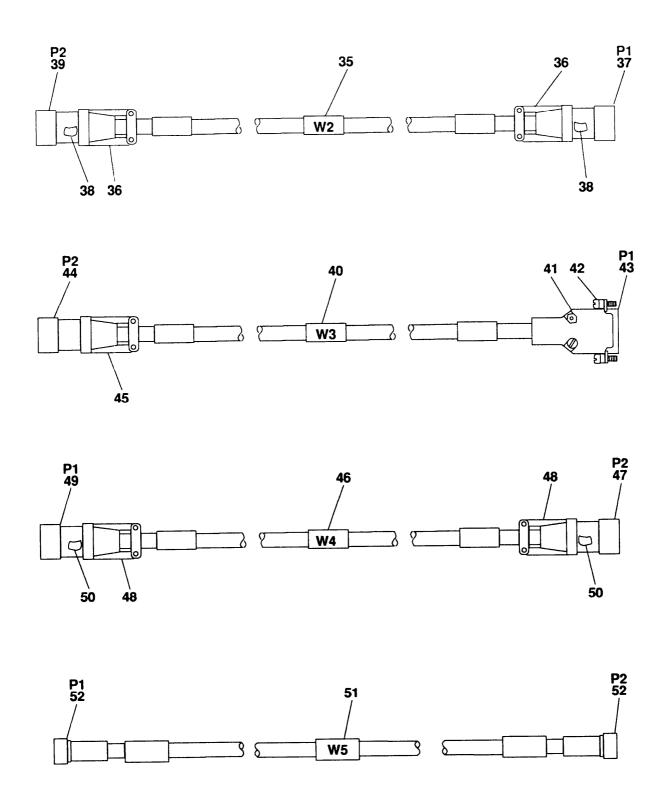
UH1H Systems Installation Cable Group (Sheet 3 of 4)
